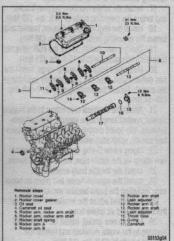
Camshaft, rocker arm and shaft assemblies-3.5L engine
